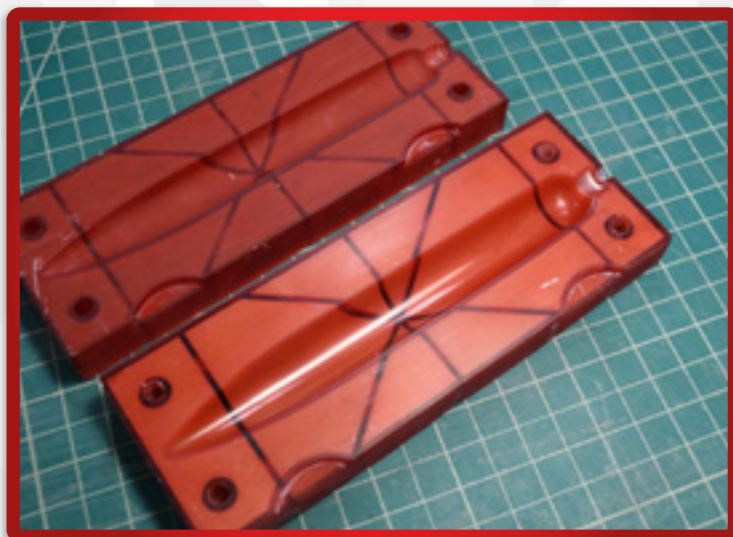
THIS IS MY 2-PART MOLD FOR MAKING SUSTAINER BODY TUBES FOR THE 2-STAGE ROCKET ALTITUDE EVENT. THE TOP PART IS JUST OUT OF THE 3D PRINTER, WHILE THE BOTTOM ONE HAS BEEN POLISHED SMOOTH.
